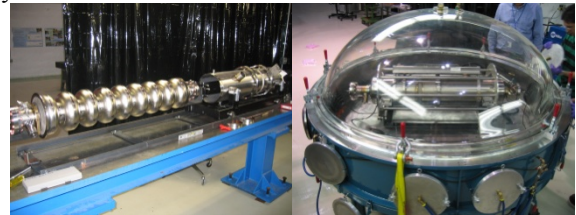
Cavity to Helium Vessel Assembly & Welding Infrastructure at CAF.
